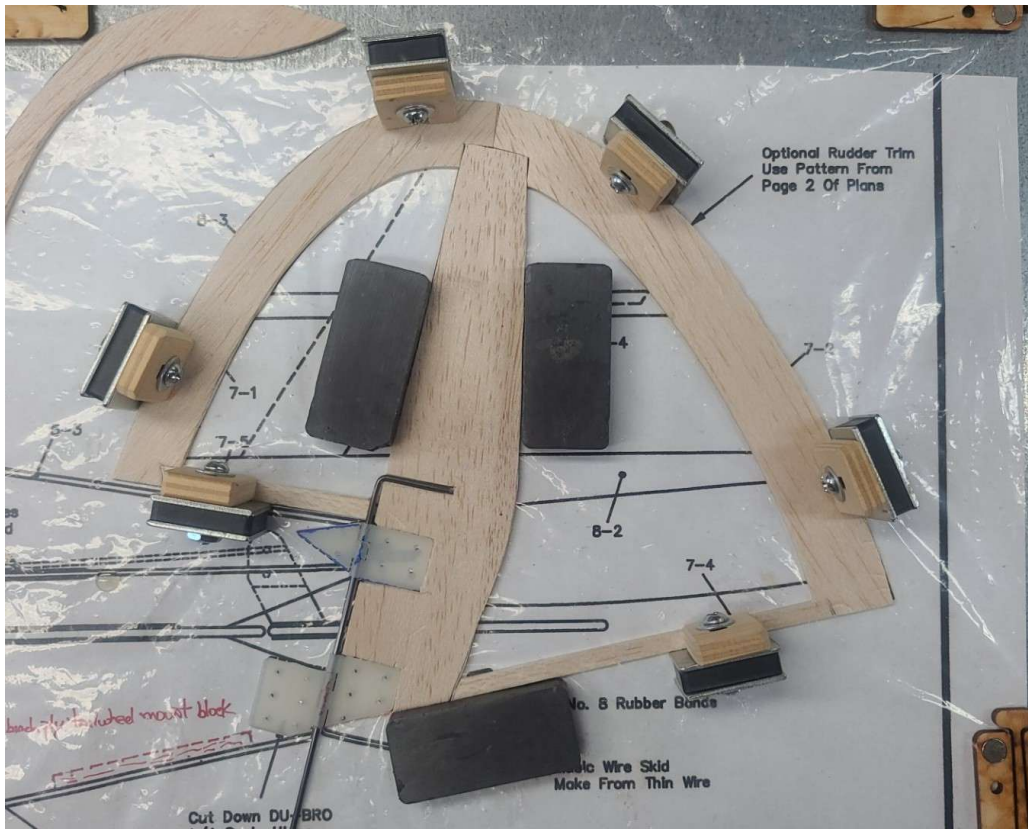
Combined Vertical Stabilizer/Rudder and Tailwheel Assembly Fit Check
